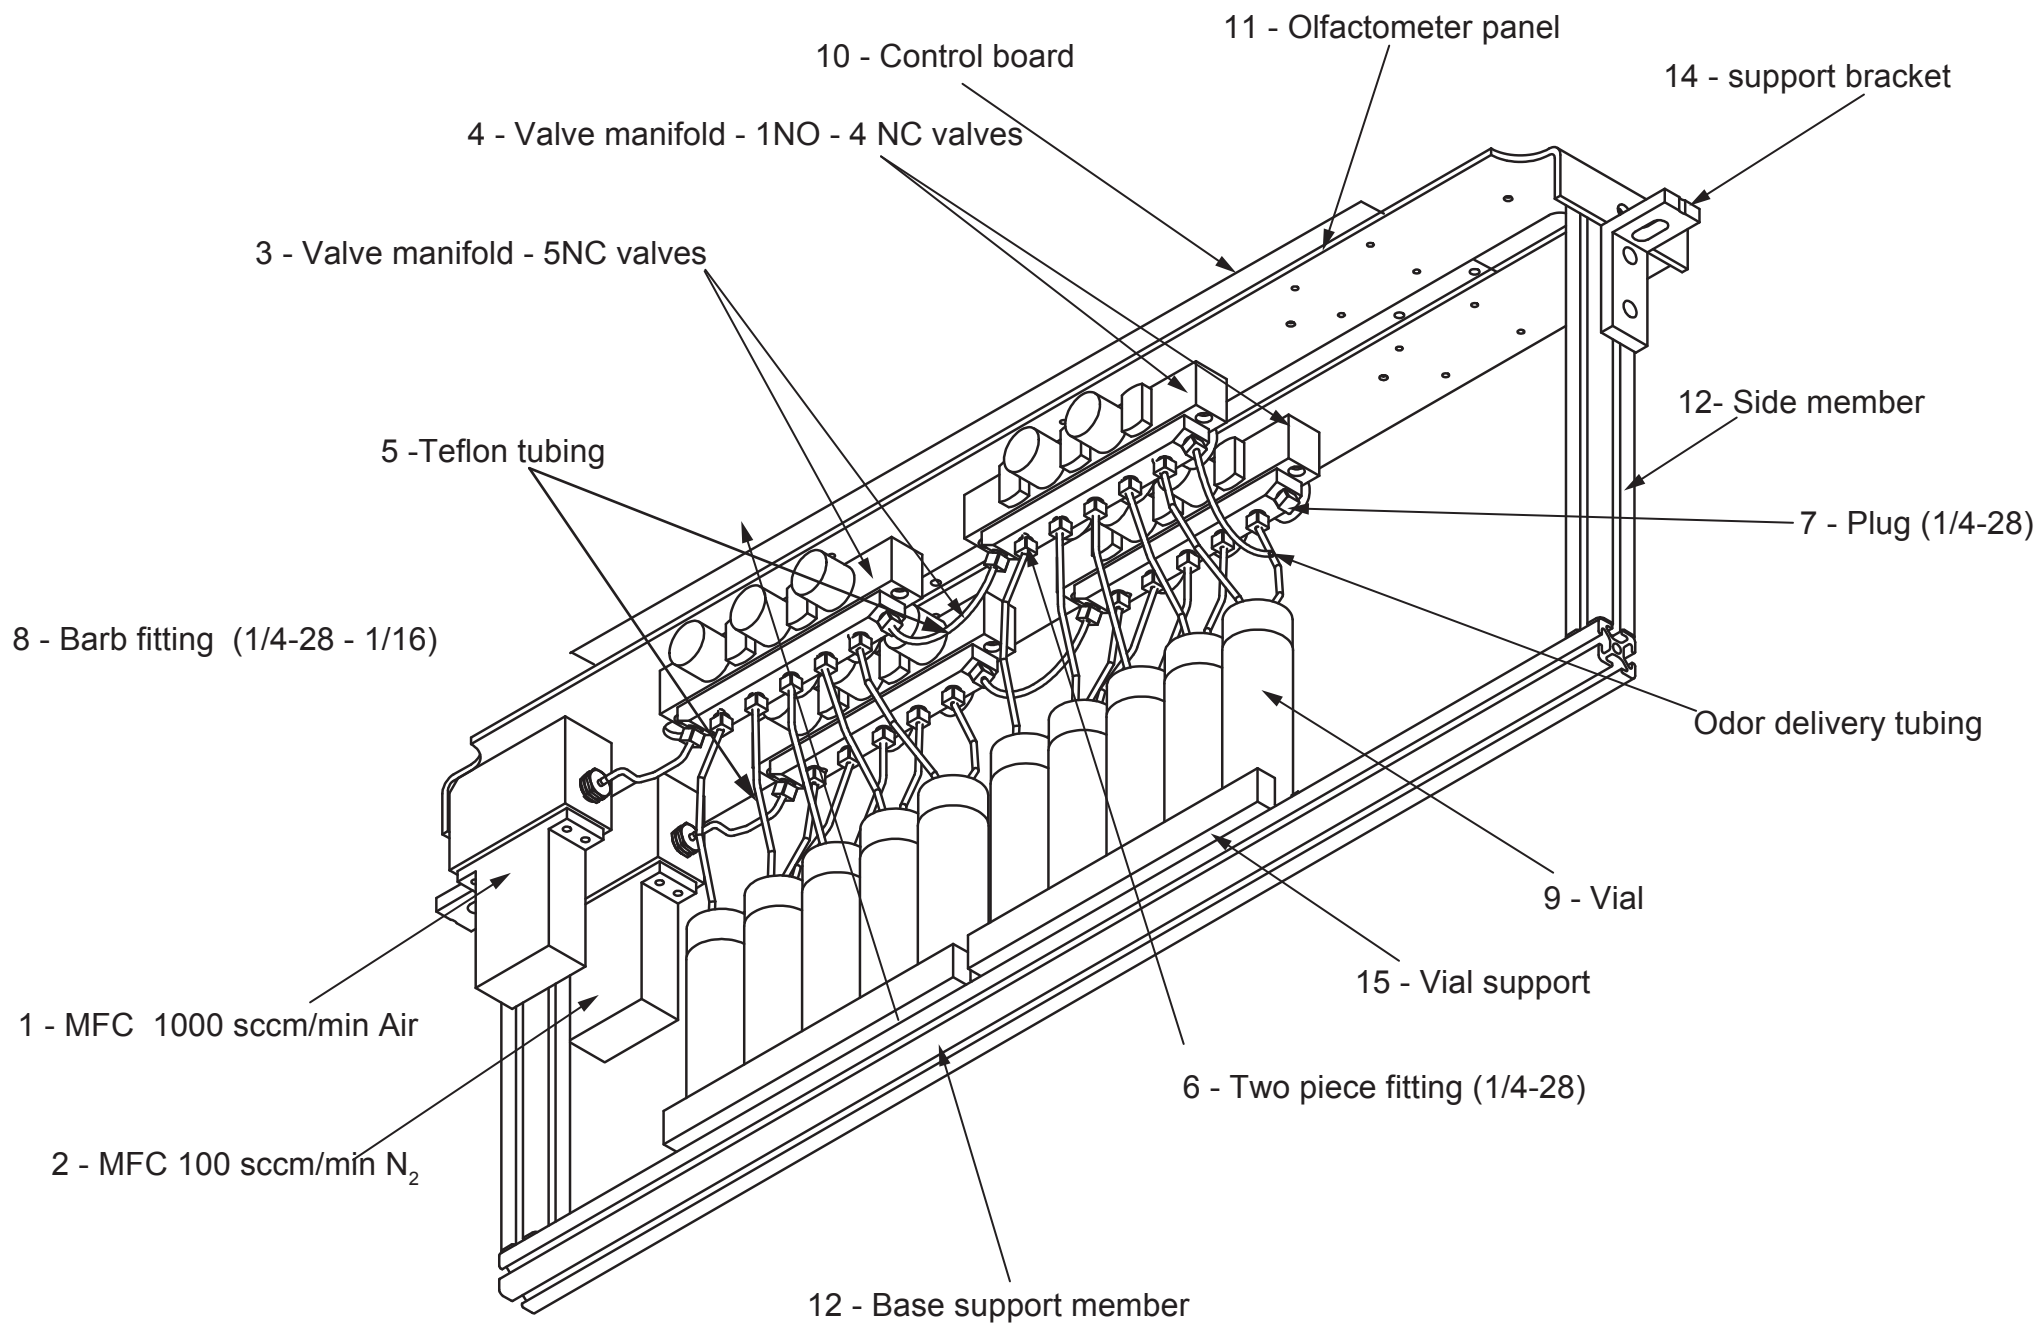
Single olfactometer cassette assembly schematics. The purchased and manufactured part lists are in Table 1 & 2 .
